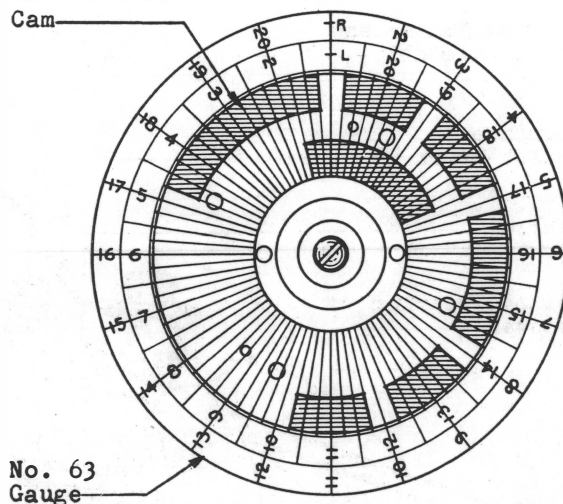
Method of Checking 20-position Cams With the No. 63 Gauge
